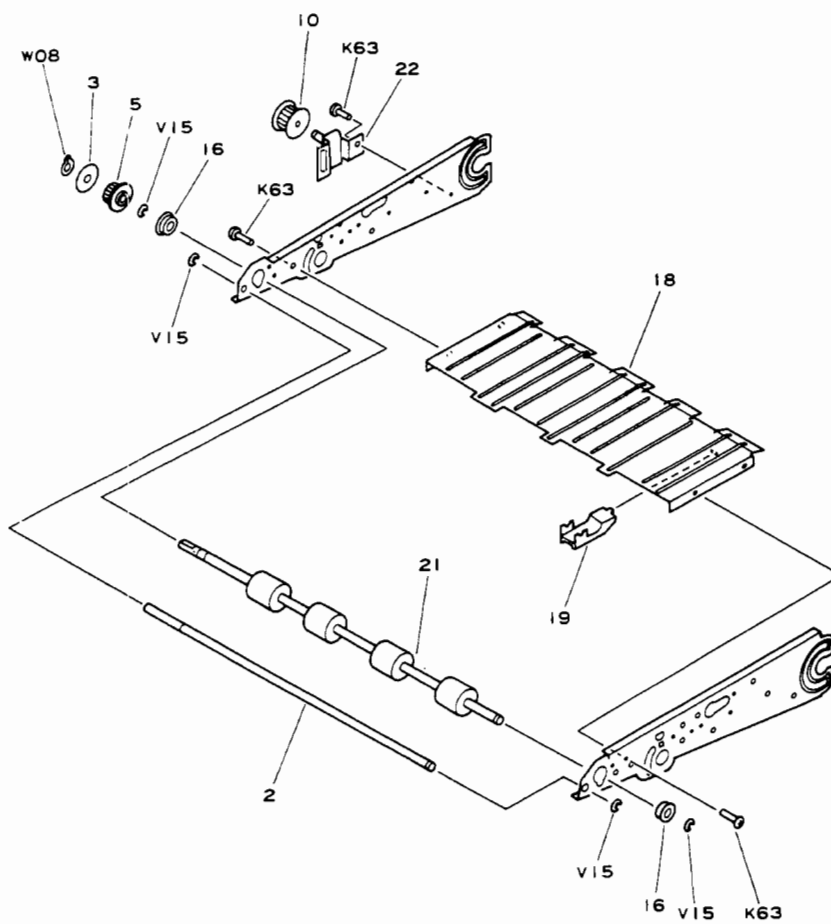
6. Belt Feeder Assembly (2 of 2)
